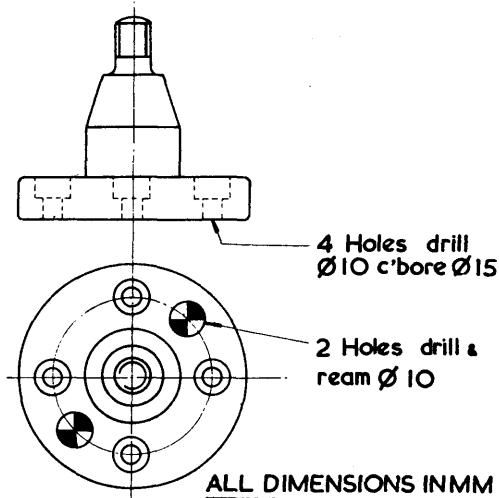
Component Requiring Drilled, Reamed and Counterbored Holes.
